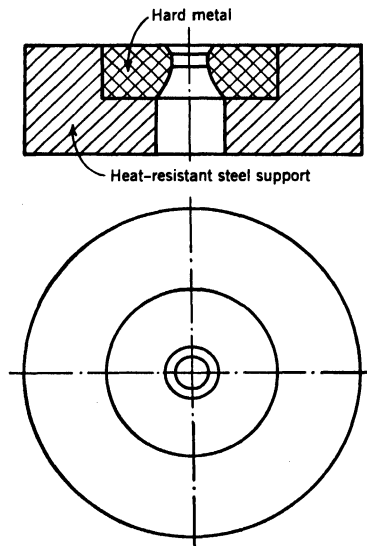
Schematic drawing of an extrusion die with hard metal liner (according to Kieffer and Hotop<sup>1139</sup>).
